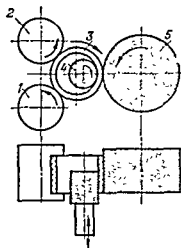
Motions of the wheel and work in centreless internal grinding:
